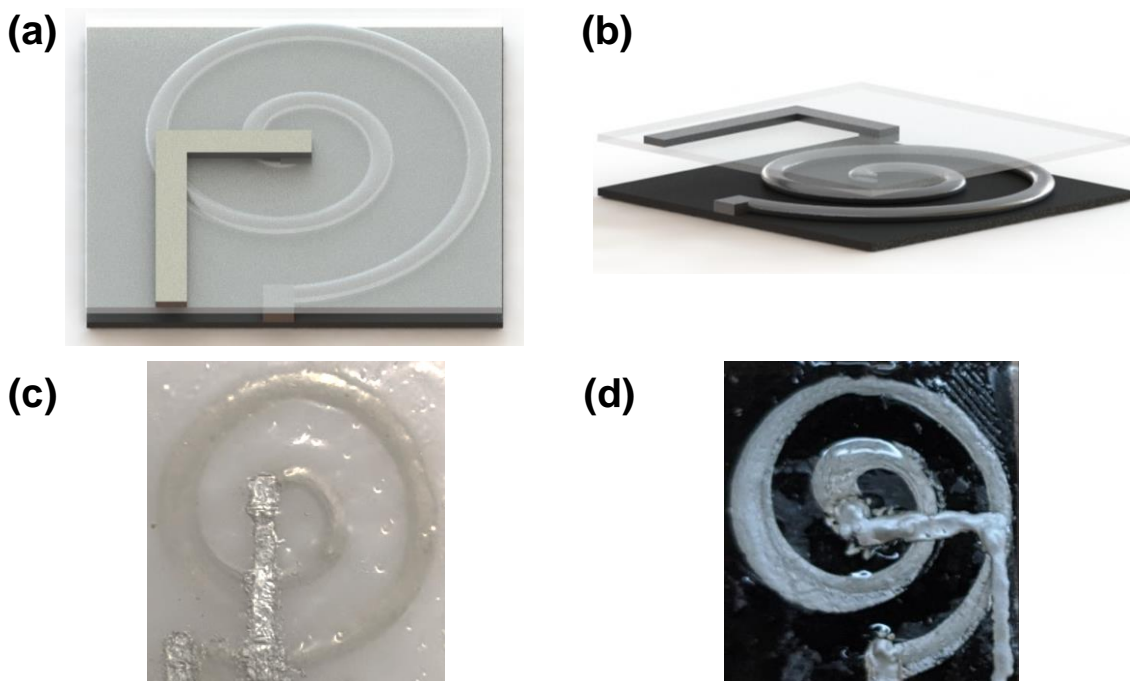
CAD representation of single-width embedded inductors (a) and exploded view in (b). Printed samples with a backplane of PCL (c) and Ferrite-PCL (b).
